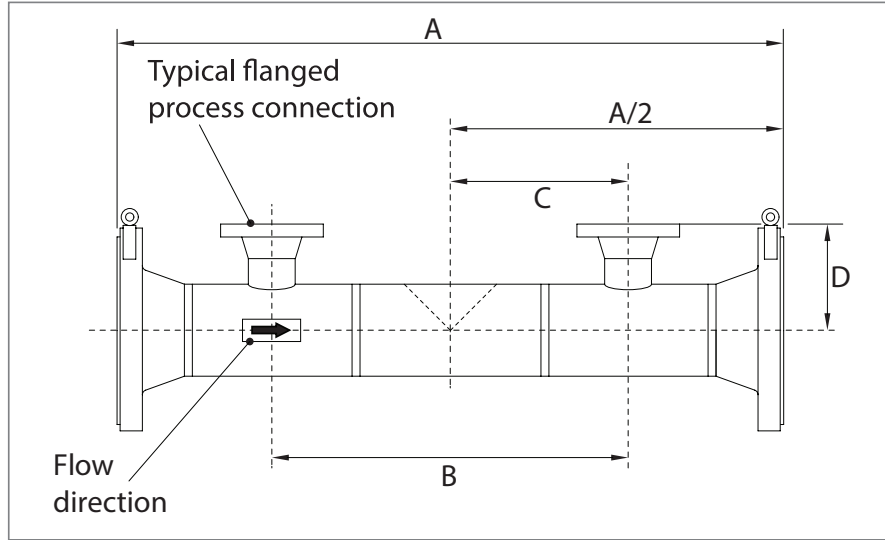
Tek-DP 1670A With Flanged Tappings and RFWN End Flanges (1 1/2, 2 and 3")
